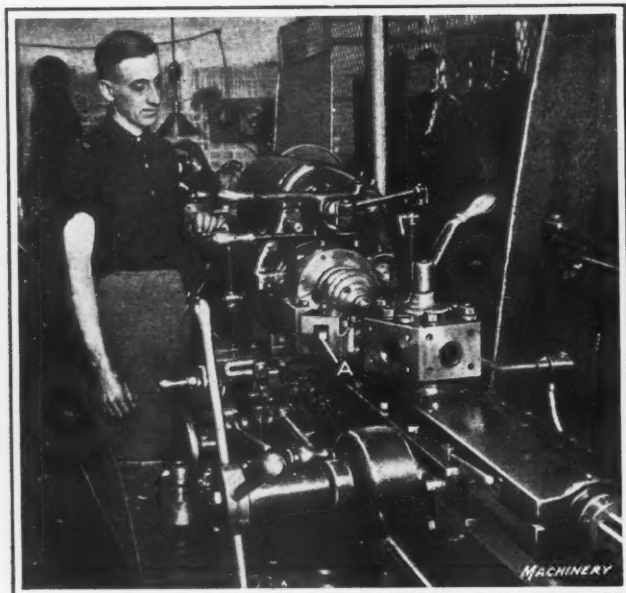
Finish-turning the Neck of the Bowl Shell on a Hexagon Turret Lathe
